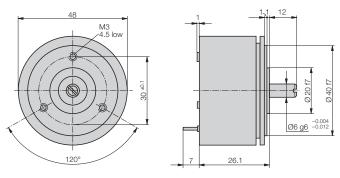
KINAX 3W2 with shaft dia. 6 mm, length 12 mm.
